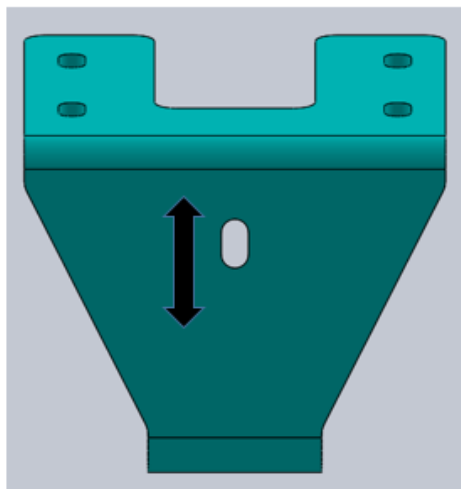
Front view of Front Bracket highlighting assembly allowance.
